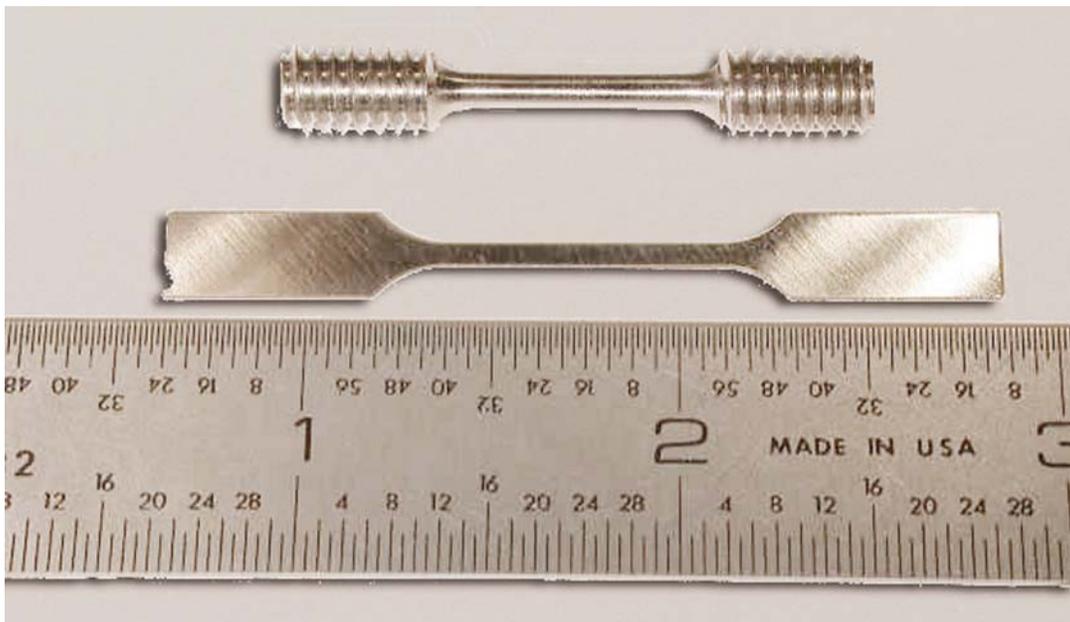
LENS Deposited Tensile Specimens Machined into Round and Flat Tension Test Coupons
